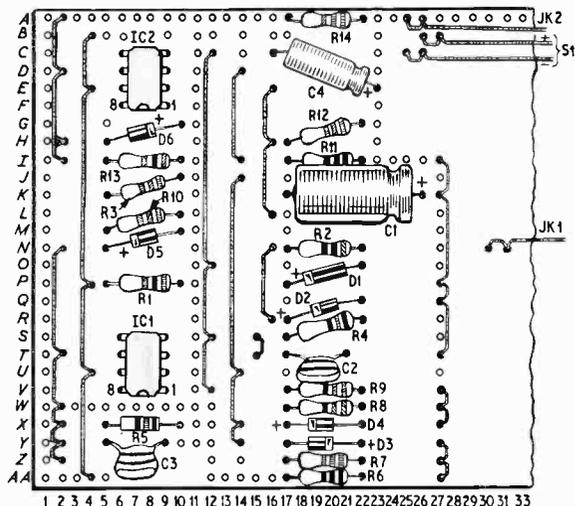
Component assembly and wiring details of Veroboard panel (Note that the copper strip should be cut at 19T)
